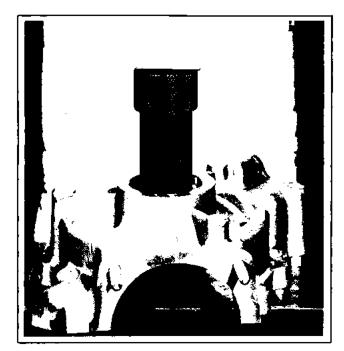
E-65. Pressing Transmission Shaft Bearing from Left Crankcase
